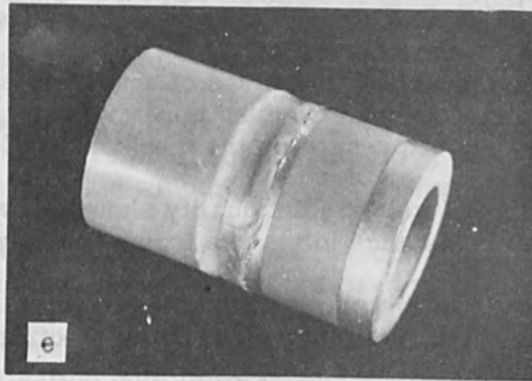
(Continued). (d) welding ceramics of different types (95% and 99% Al_2O_3), (e) electron-beam welded article appearance, (f) welded article appearance
